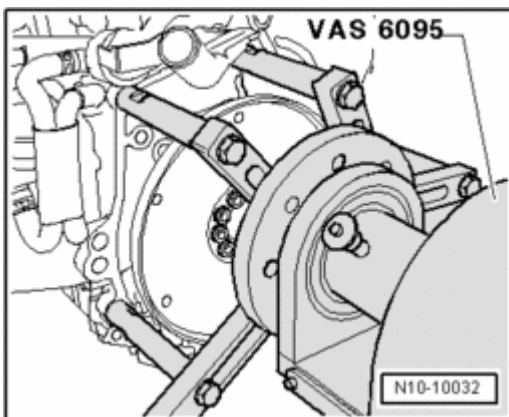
Identifying Engine And Transmission Holder VAS 6095
